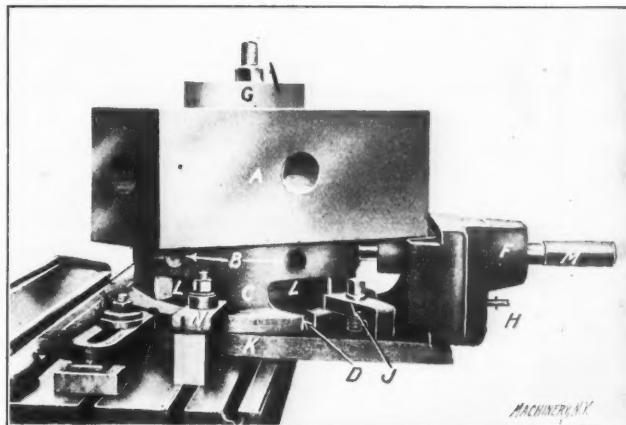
A Combination Boring, Planing and Milling Fixture.
